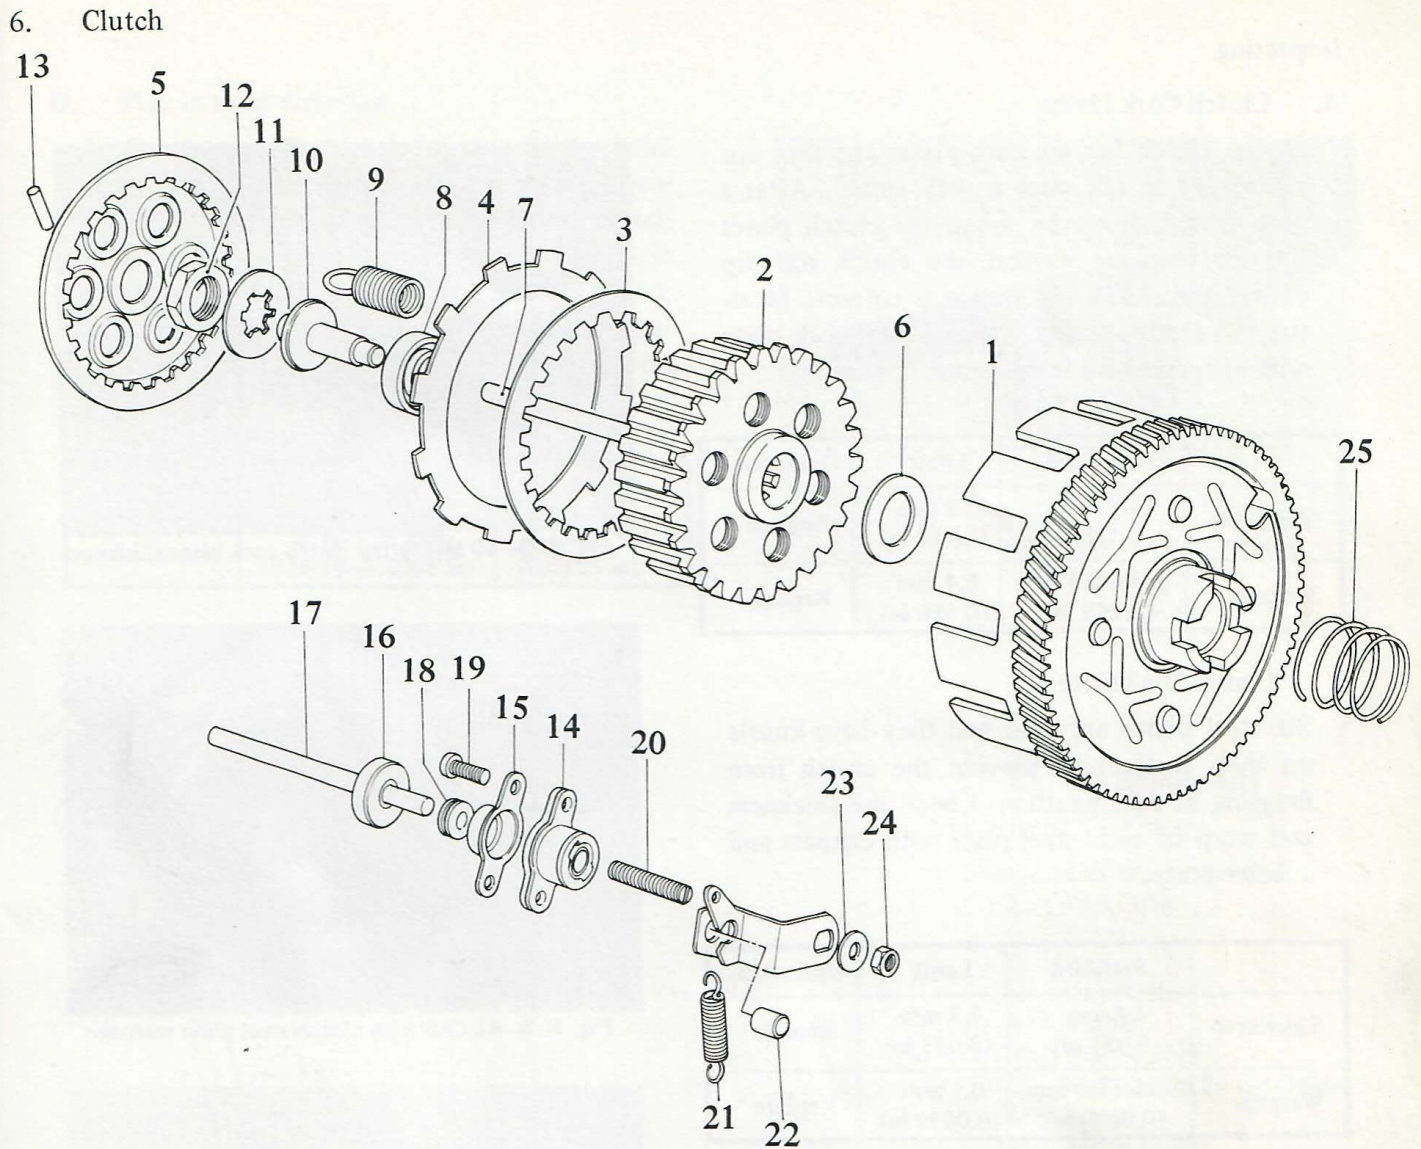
Exploded view of TS100/TC100 clutch
